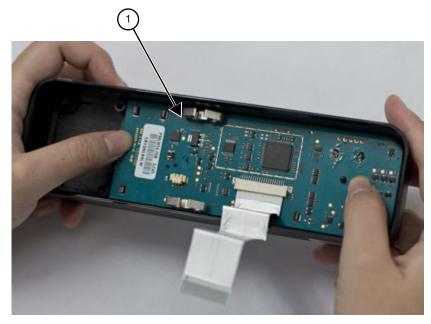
Assembling Display Pad Gasket and Control Head Flex
